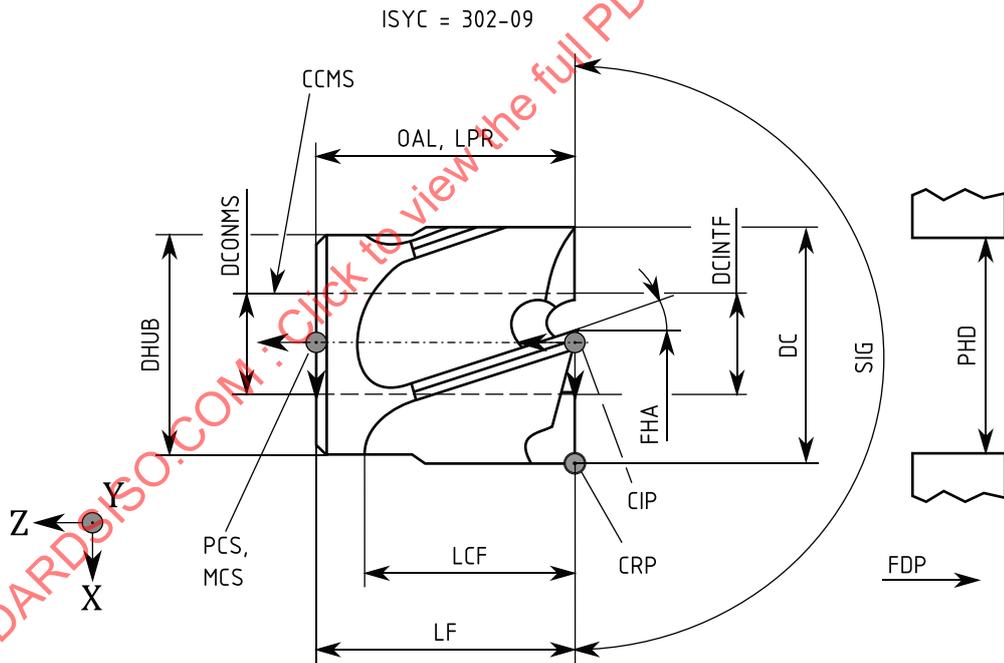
ISYC 302-09 - Shell counterbore top, solid
